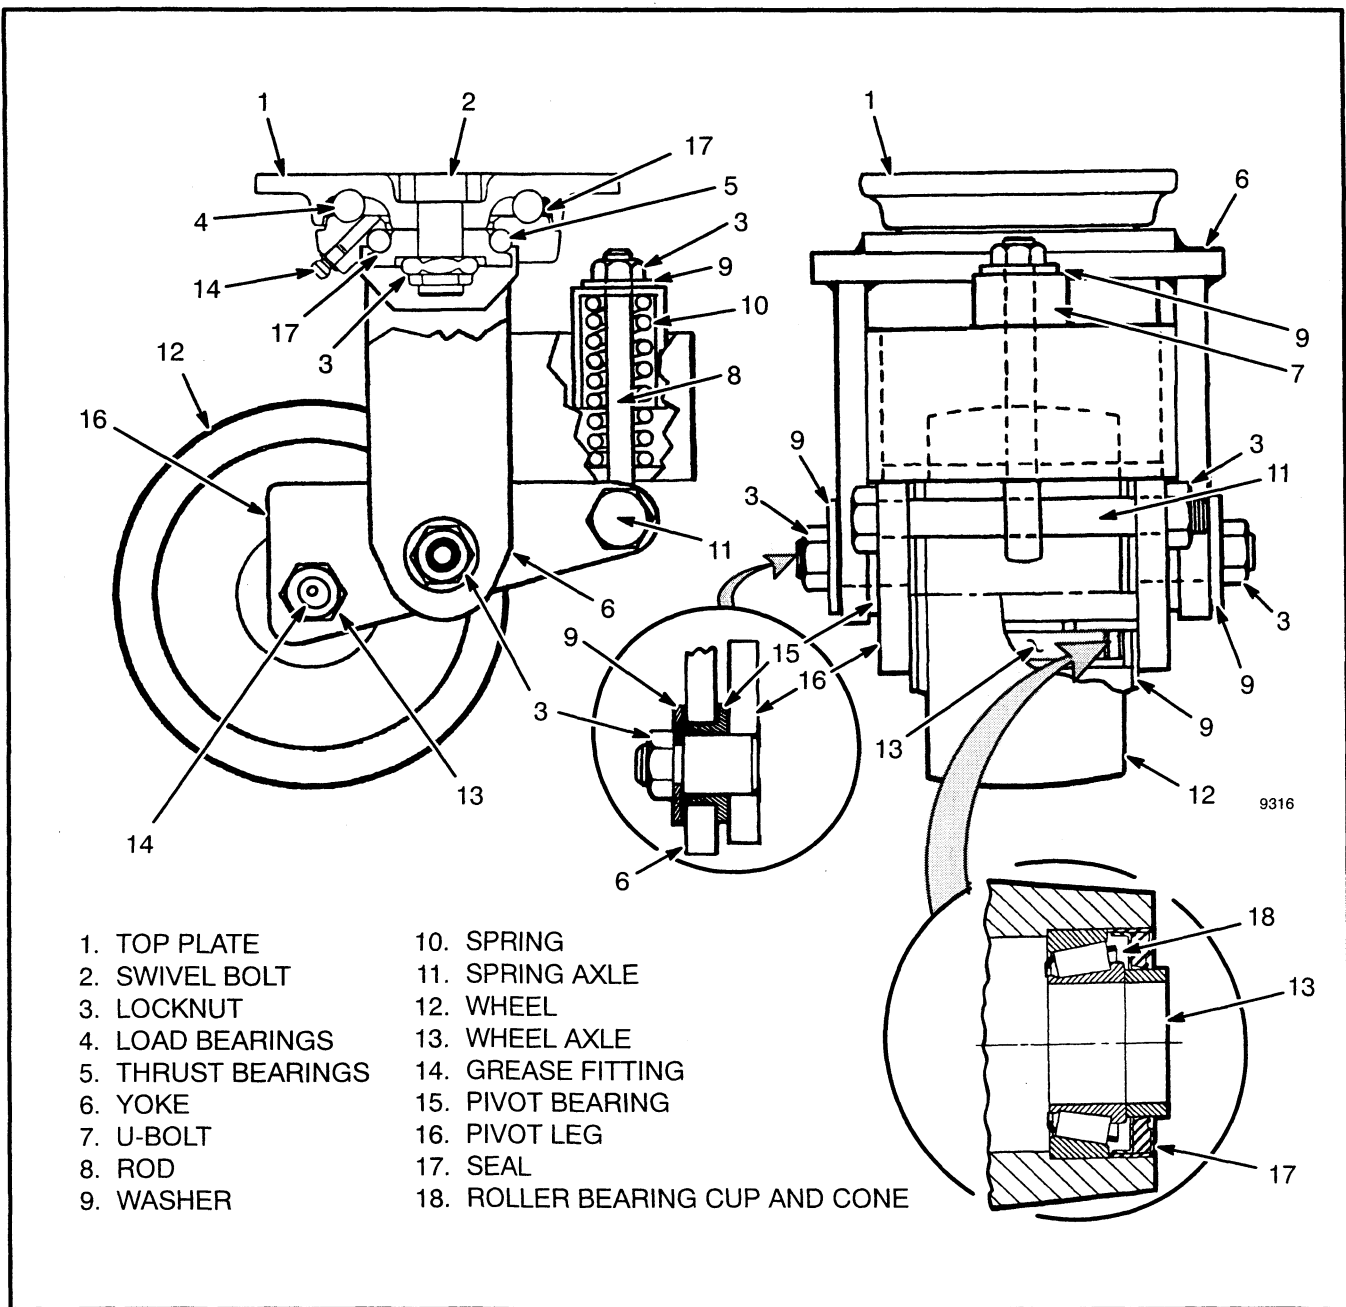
OPTIONAL CASTERS – B40-60XL, B40CL
